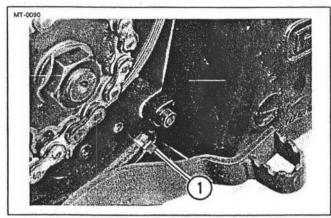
Crankcase Breather Tube and Connection at Engine Crankcase
